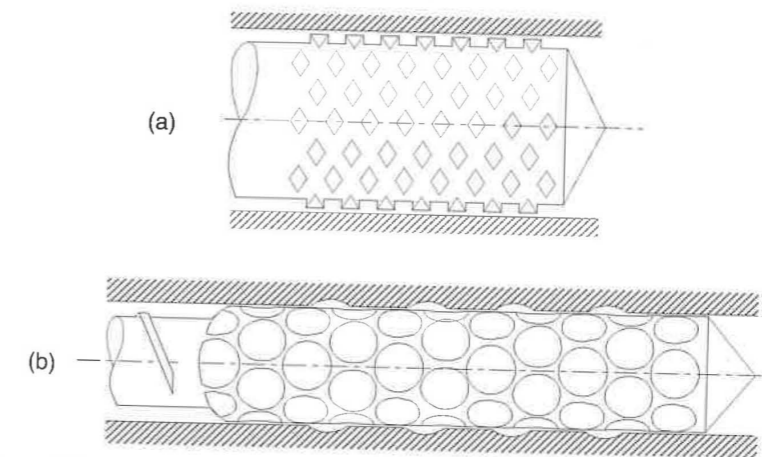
Distributive mixing sections: (a) Pineapple mixing section, (b) cavity transfer mixing section.
